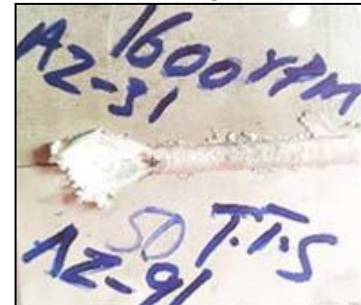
The weld was made at 1600rpm at 50 tool traverse speed with dissimilar welding Az91/Az31 alloy
